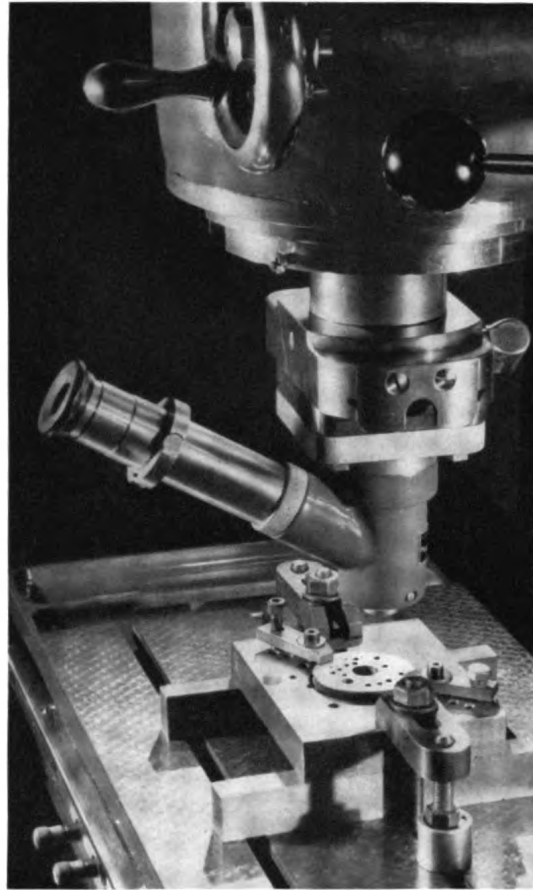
The microscope is a convenient aid in the use of a Jig Borer or Jig Grinder for inspection.
